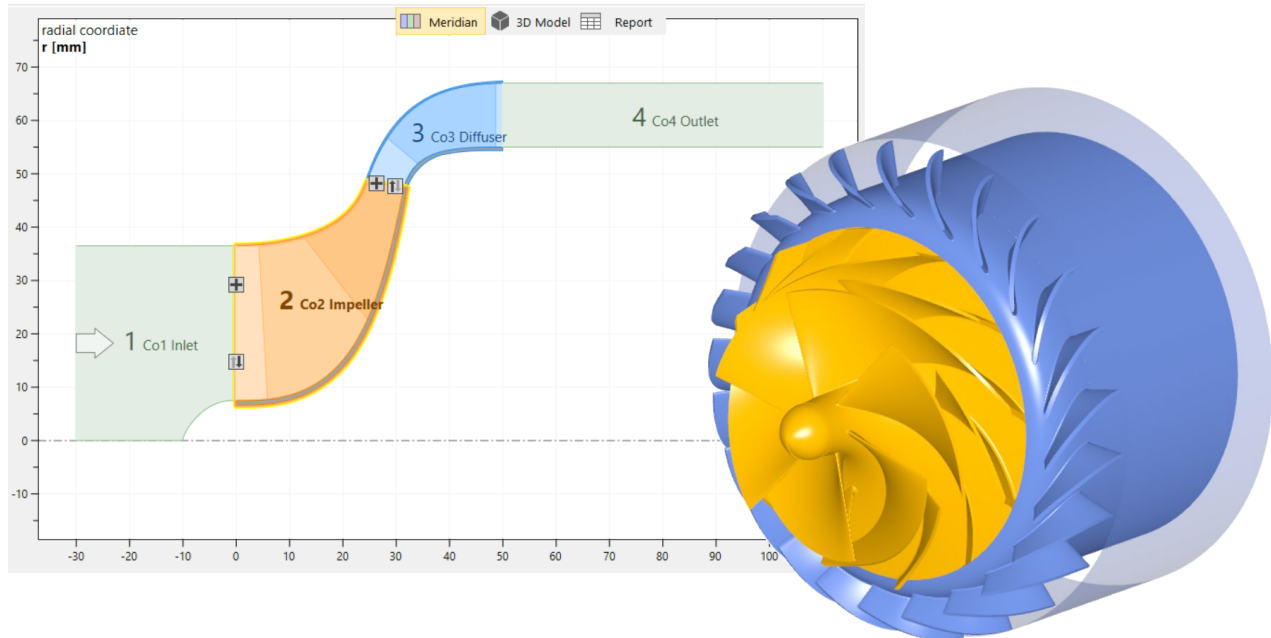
Initial design of the compressor: Impeller with splitter blades, diffuser with short blades
